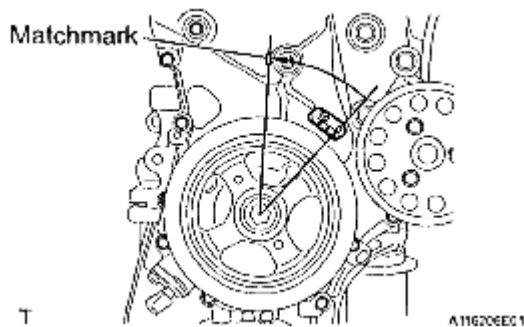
Identifying Matchmark Of Timing Chain Cover
